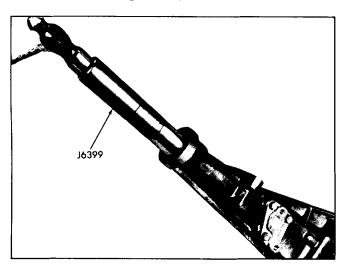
D-27 Removing or Installing Rear Extension Bushing
